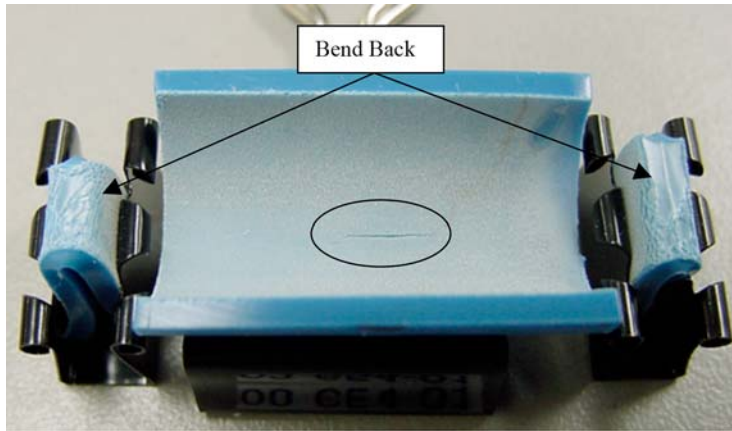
Optical image of inner surface of failure showing crack opening (center) and associated surface cracking and crazing (oxidatively induced Stage II)
